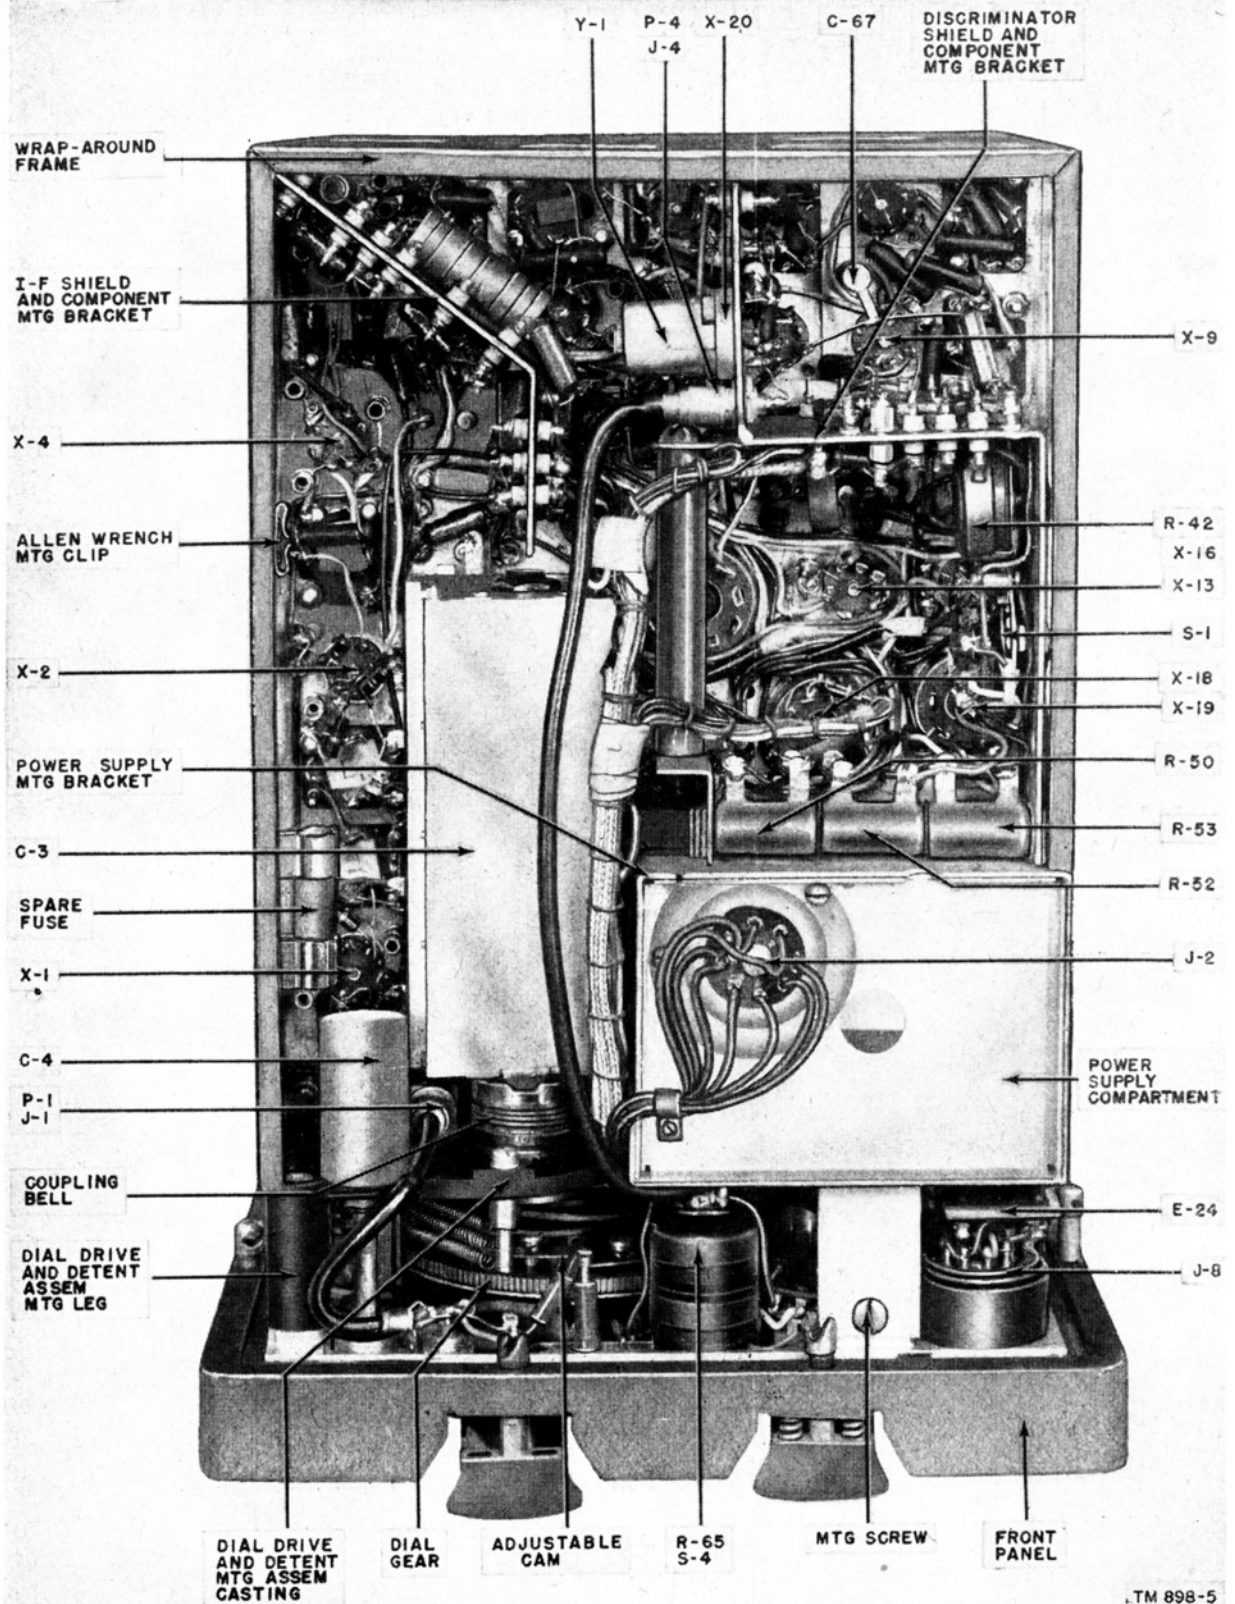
Typical radio receiver, case removed, wiring (right) side of panel-and-chassis assembly.
